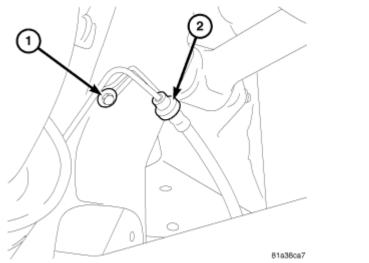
Identifying Brake Hose/Line Mounting Bolt & Line/Hose Courtesy of CHRYSLER LLC
